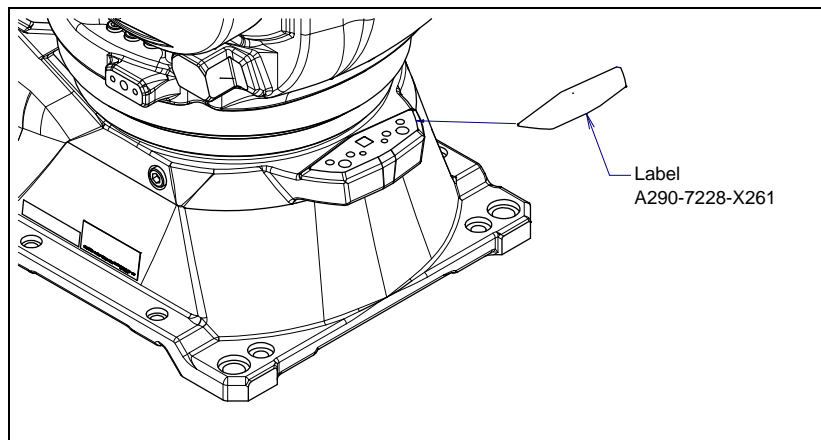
(b) Protection label for J1-axis mechanical stopper mounting position
